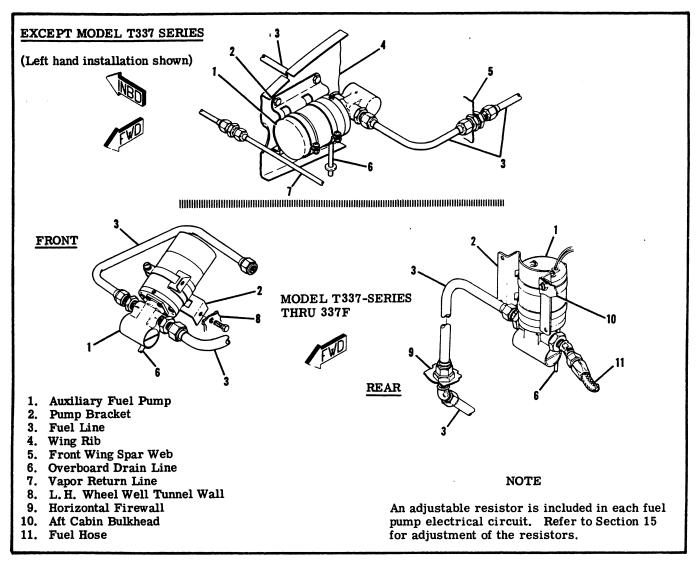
Auxiliary Fuel Pump Installation (Sheet 1 of 3)
